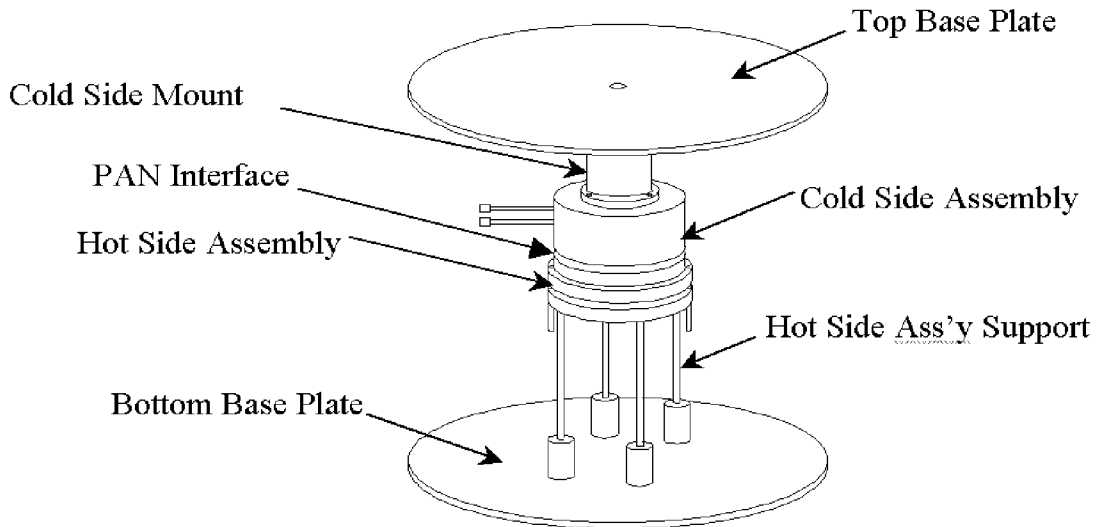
Isometric View of VEL-THERM Test Setup (not to scale)
